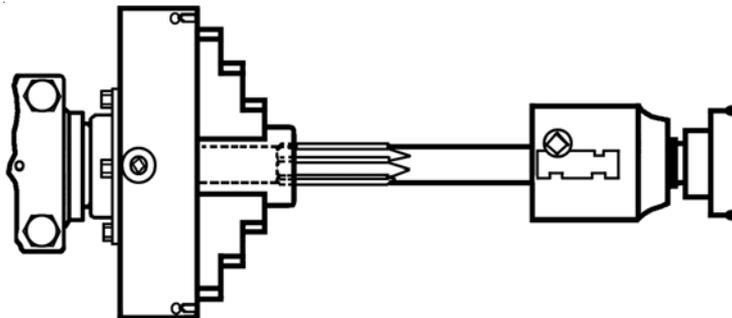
, Small straight-shank reamers may be held in a drill chuck.
